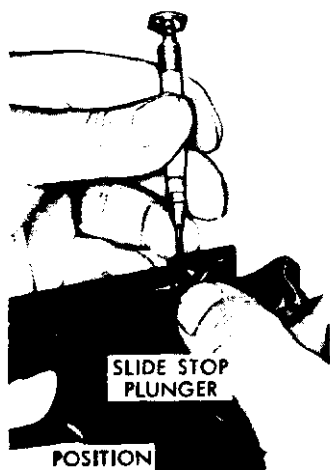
Disassembly/assembly of receiver group (1 of 7).
